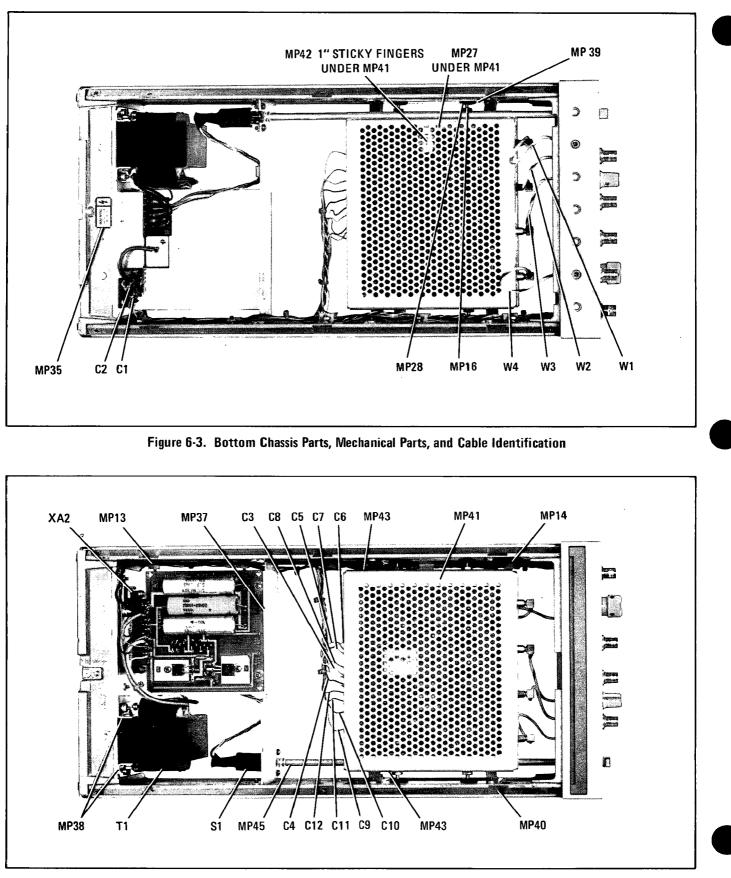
Top Chassis Parts, Mechanical Parts, and Cable Identification
